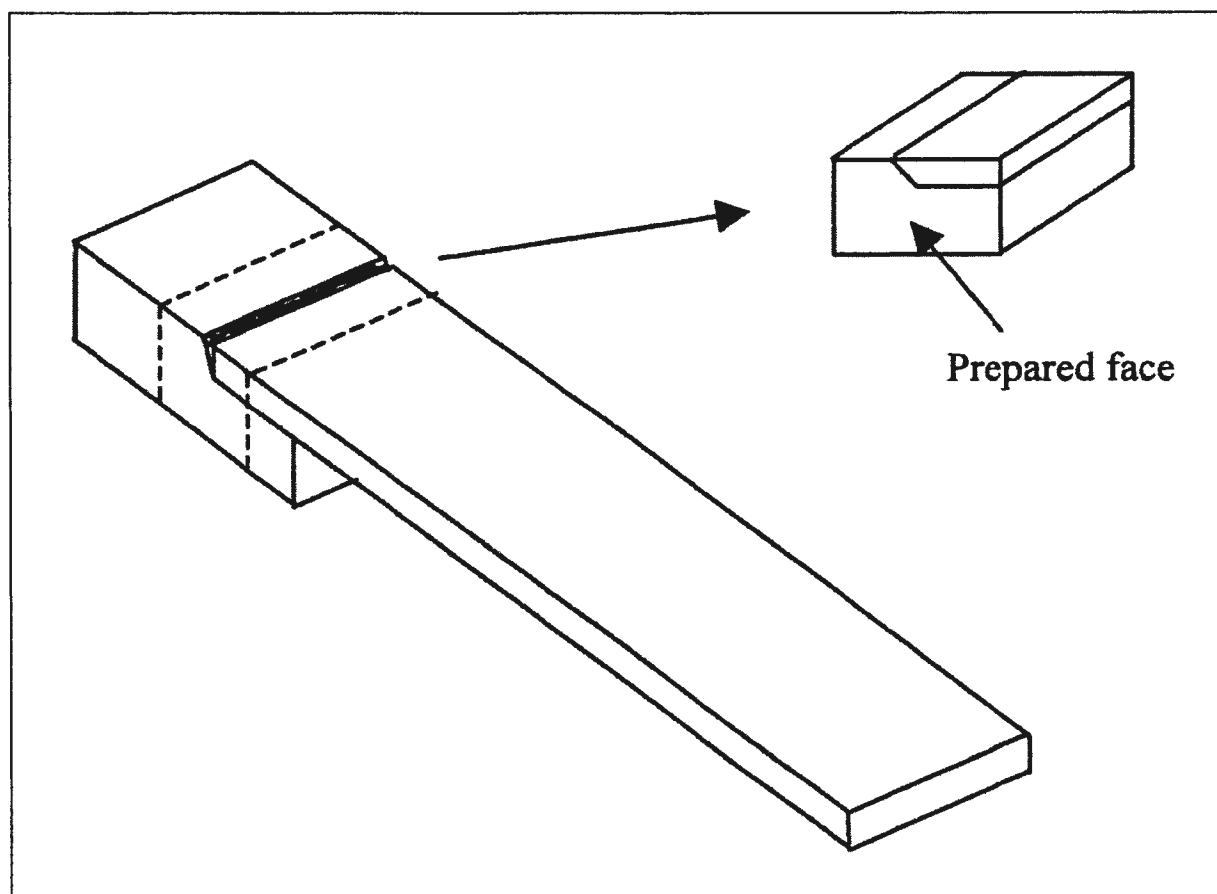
Schematic illustrating metallographic sectioning for the fillet weld specimen.
